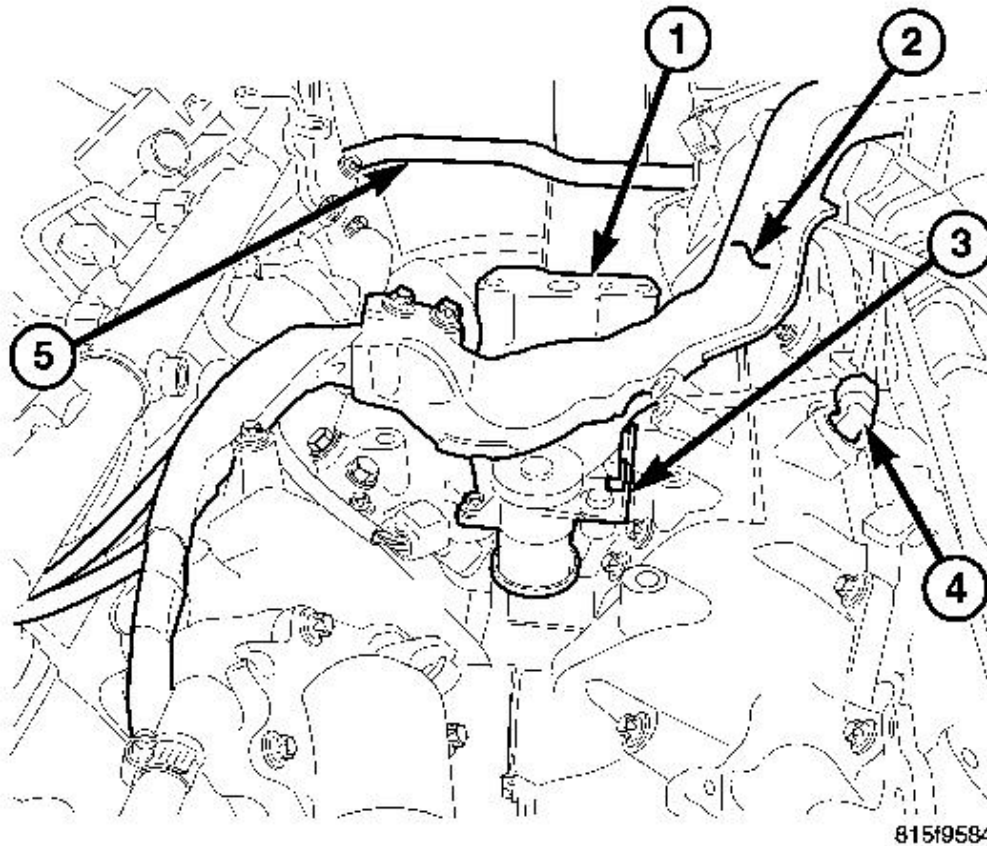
Turbocharger Oil Housing Adapter, Main Engine Wiring Harness, Swirl Valve Actuator & Coolant Temperature Sensor
